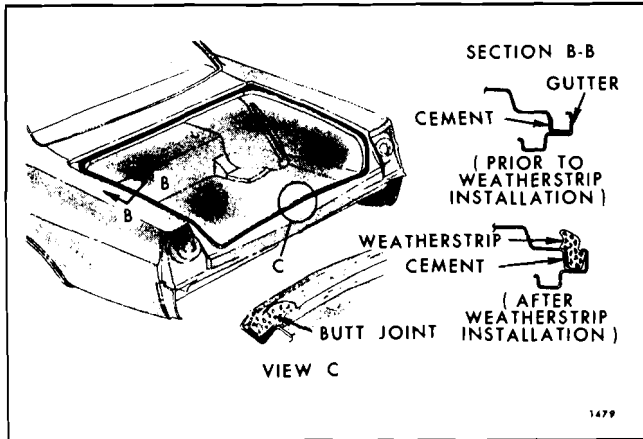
Rear Compartment Weatherstrip Assembly
